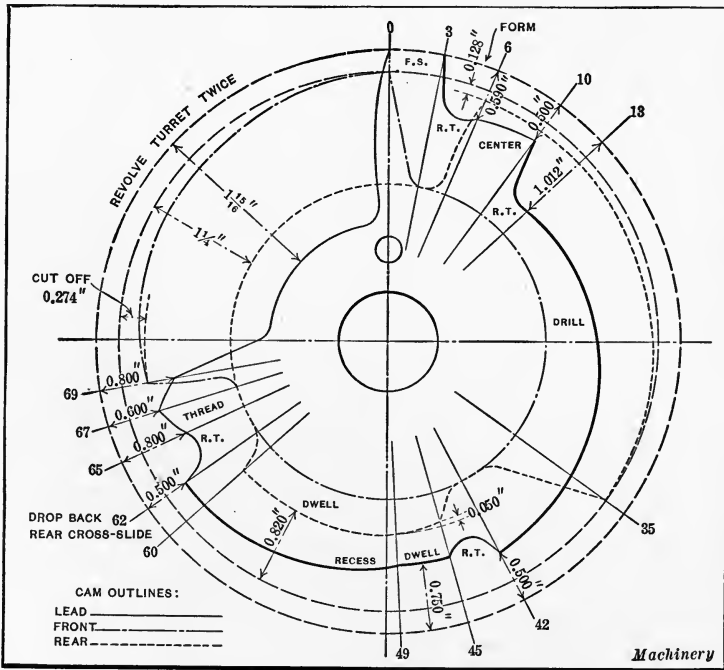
Cams used in Making the Piece shown in Fig. 5
